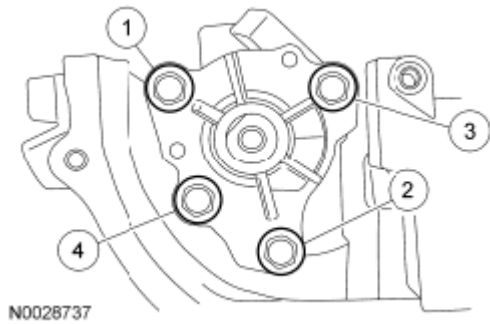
Identifying Oil Pump Assembly Bolt Tightening Sequence
